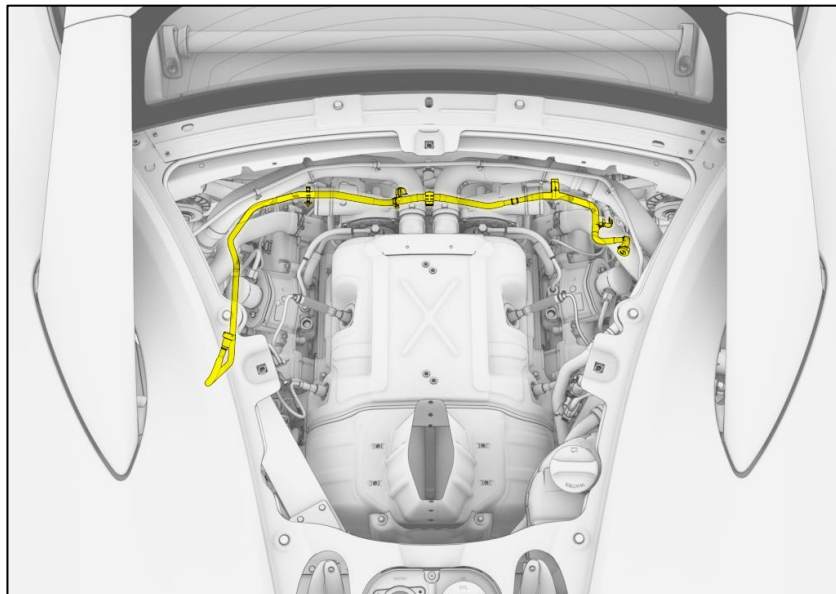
Low Pressure Fuel Supply Assembly to GDI Pumps location
